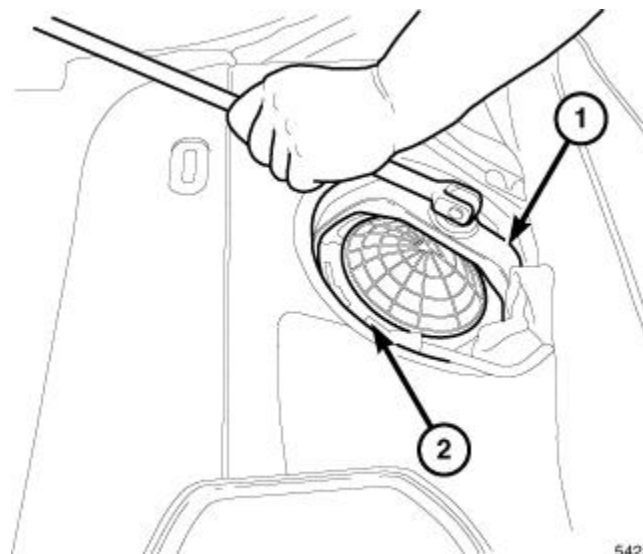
Fuel Pump Lock Ring Wrench & Lock Ring
